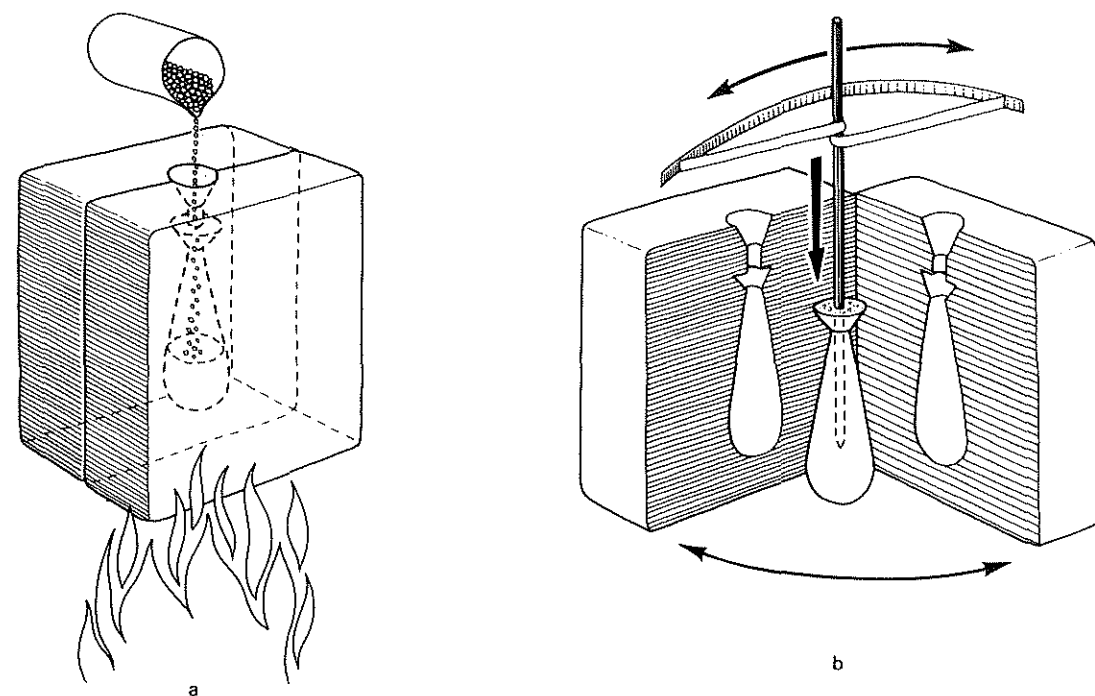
Diagram to illustrate the technique for casting the blank of a glass vessel to be worked as if it was of stone (earlier first millennium BC) (after drawings by Paul Seiz, in Goldstein 1979: figs. 9–10): (a) Casting: heating mould and continuously adding crushed or powdered glass. (b) Blank removed; ready for drilling and polishing.
